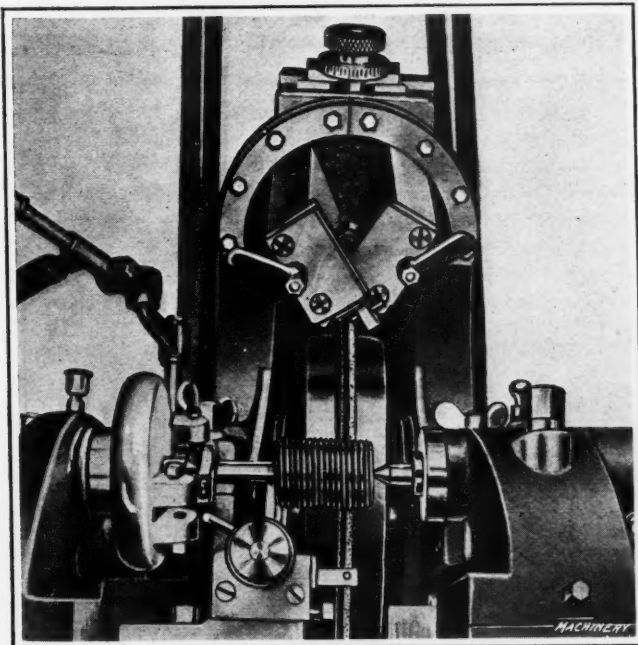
Close-up View of Wheel-truing Device and Work on Harris Thread Grinder
